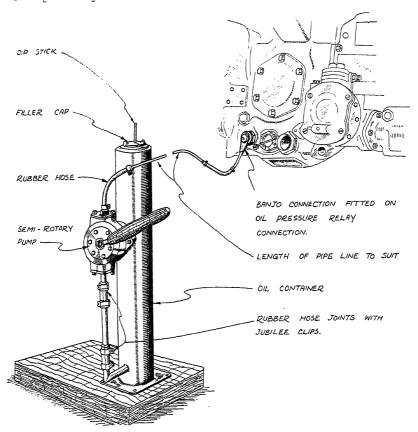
OIL PRIMING OF ENGINE LUBRICATION SYSTEM.
